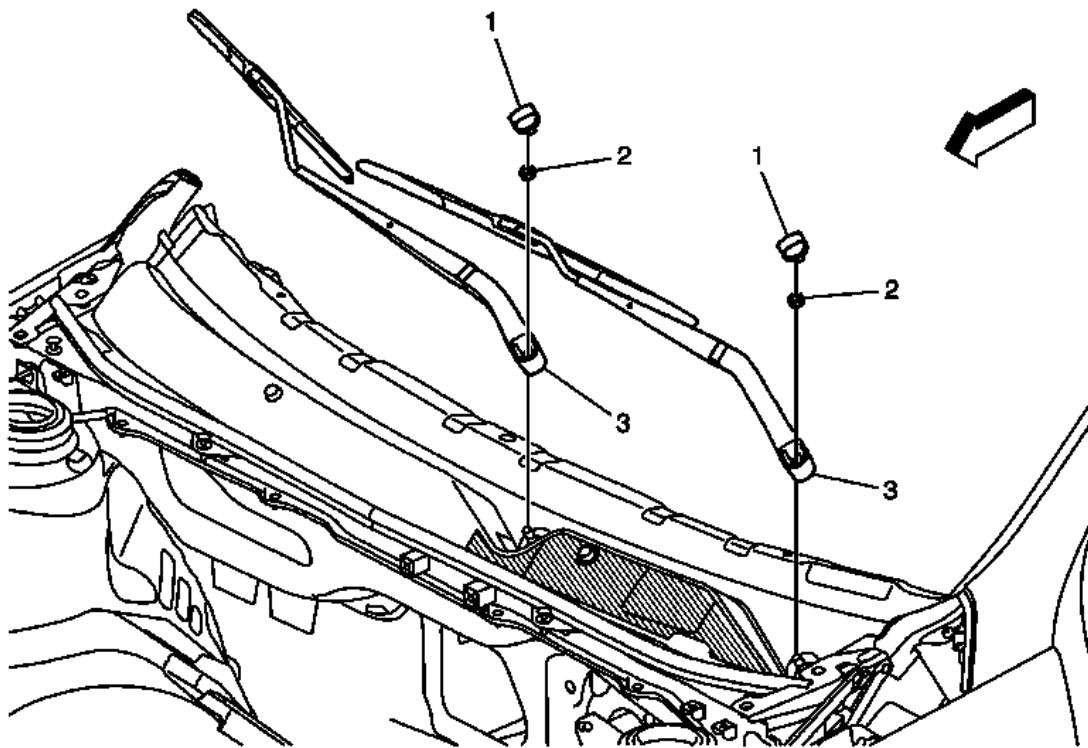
Windshield Wiper Arm, Fastener & Finish Cap
